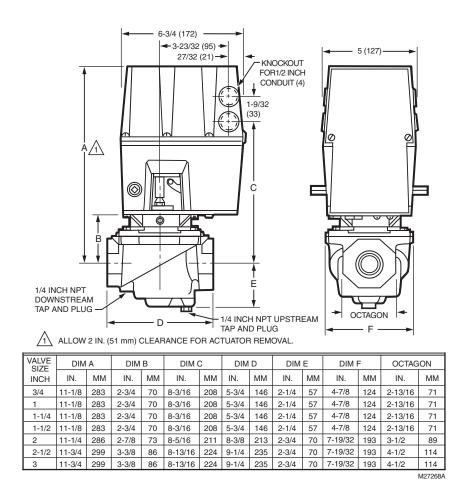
Approximate dimensions of the 3/4 through 3 in. V5055 Valves, with valve actuator, in in. (mm).
